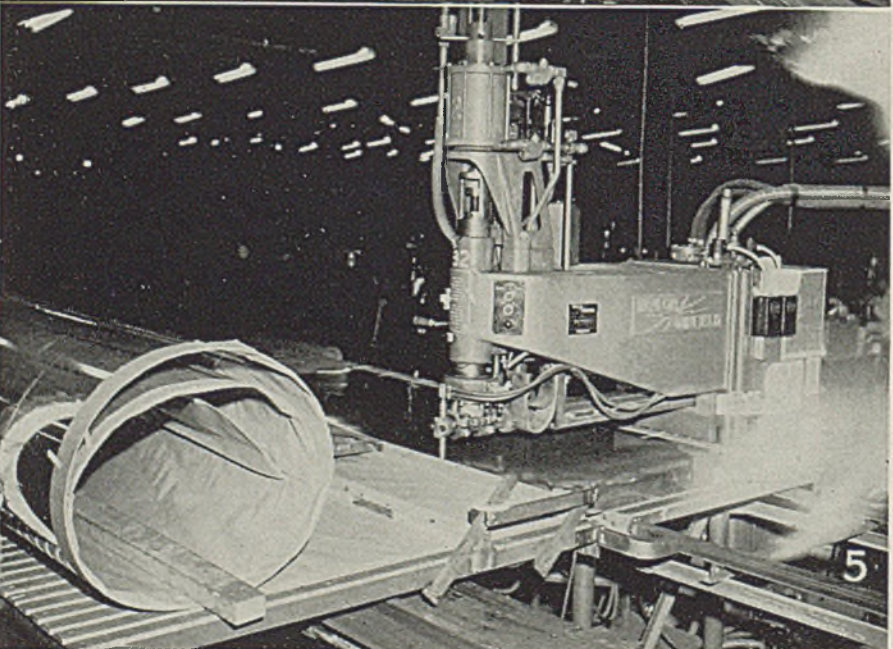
Taylor-Winfield automatic spot welder in operation on aluminum alloy wing skins. Note welded seam at top of coiled sheet at left
